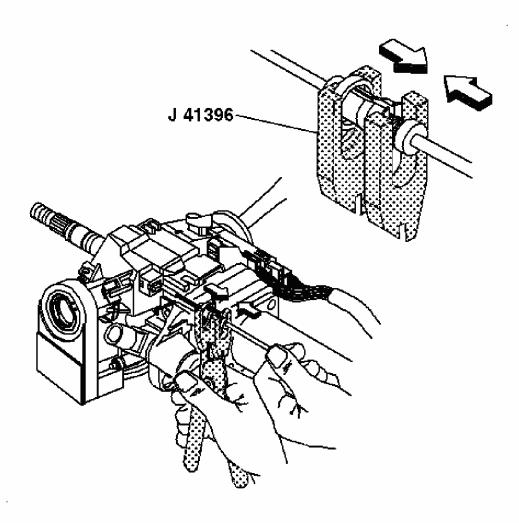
Adjusting Park Lock Cable Assembly Courtesy of GENERAL MOTORS CORP.
